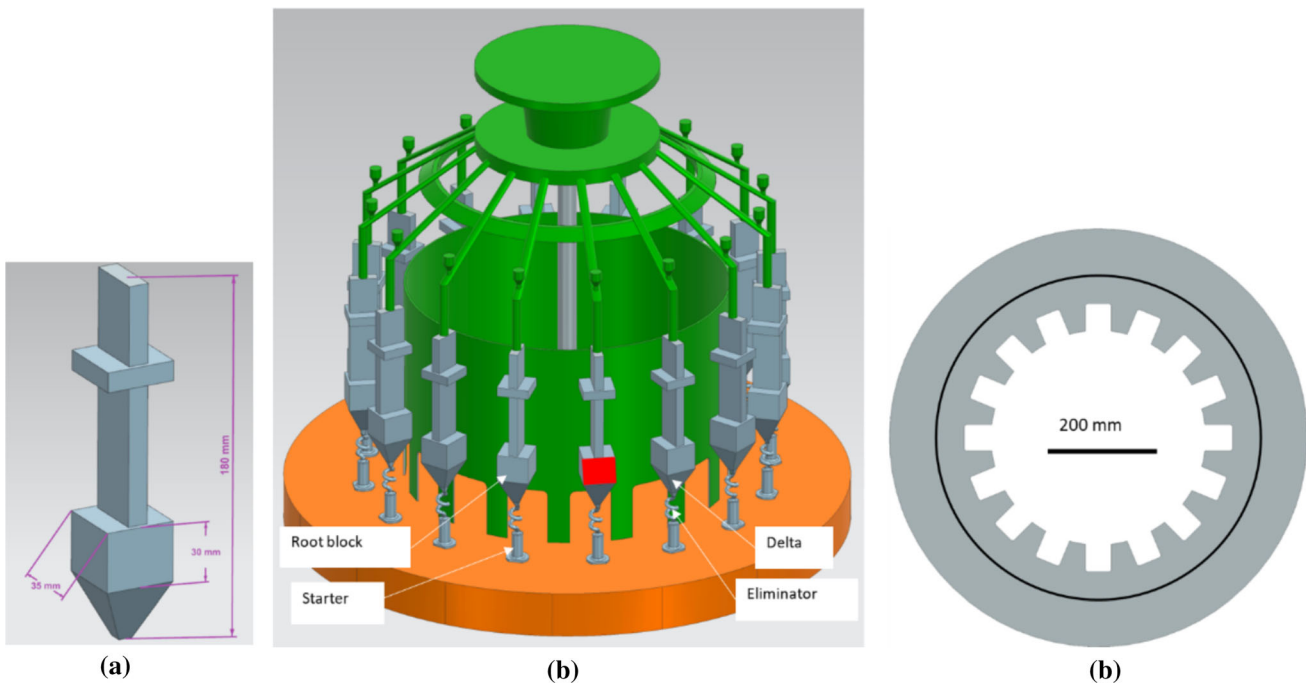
(a) Wax assembly model showing high pressure turbine blade analogues arranged circumferentially with top filling system, starter blocks, helical grain eliminators, delta, and root block. Freckle chains arise on the root block faces of width 35 mm and height 30 mm, example highlighted in red, (b) component geometry, and (c) tight (grey) and open (black circle) baffle profiles.
